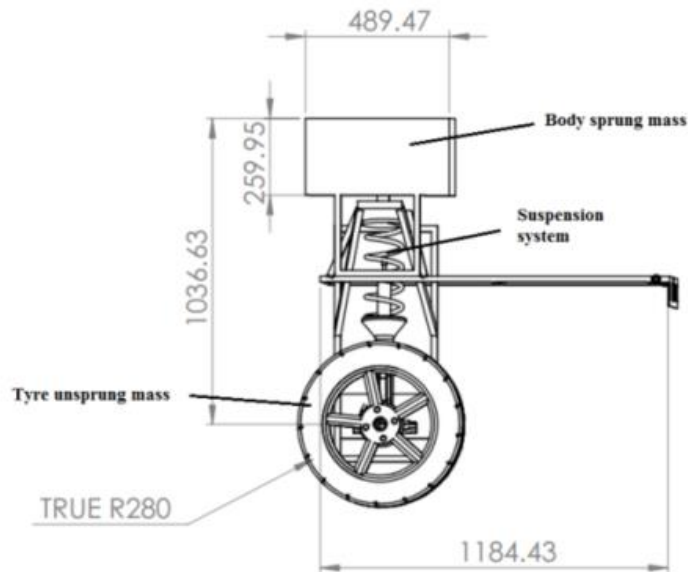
The Quarter Car Rig Drawing (Dimension in mm).
